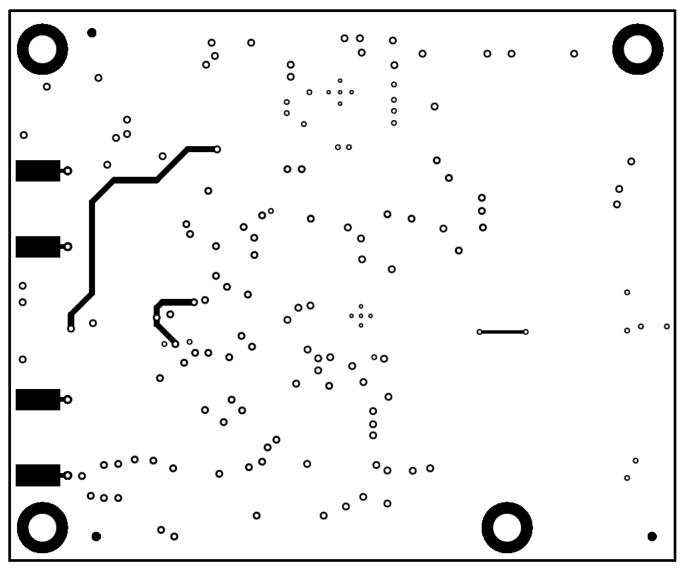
ADS9120EVM PCB Layer 4: Bottom Layer
